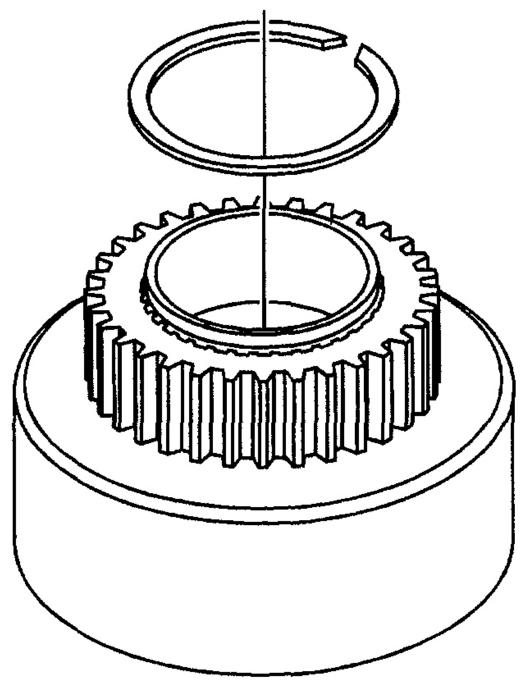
Installing Drive Sprocket Onto Clutch Housing
